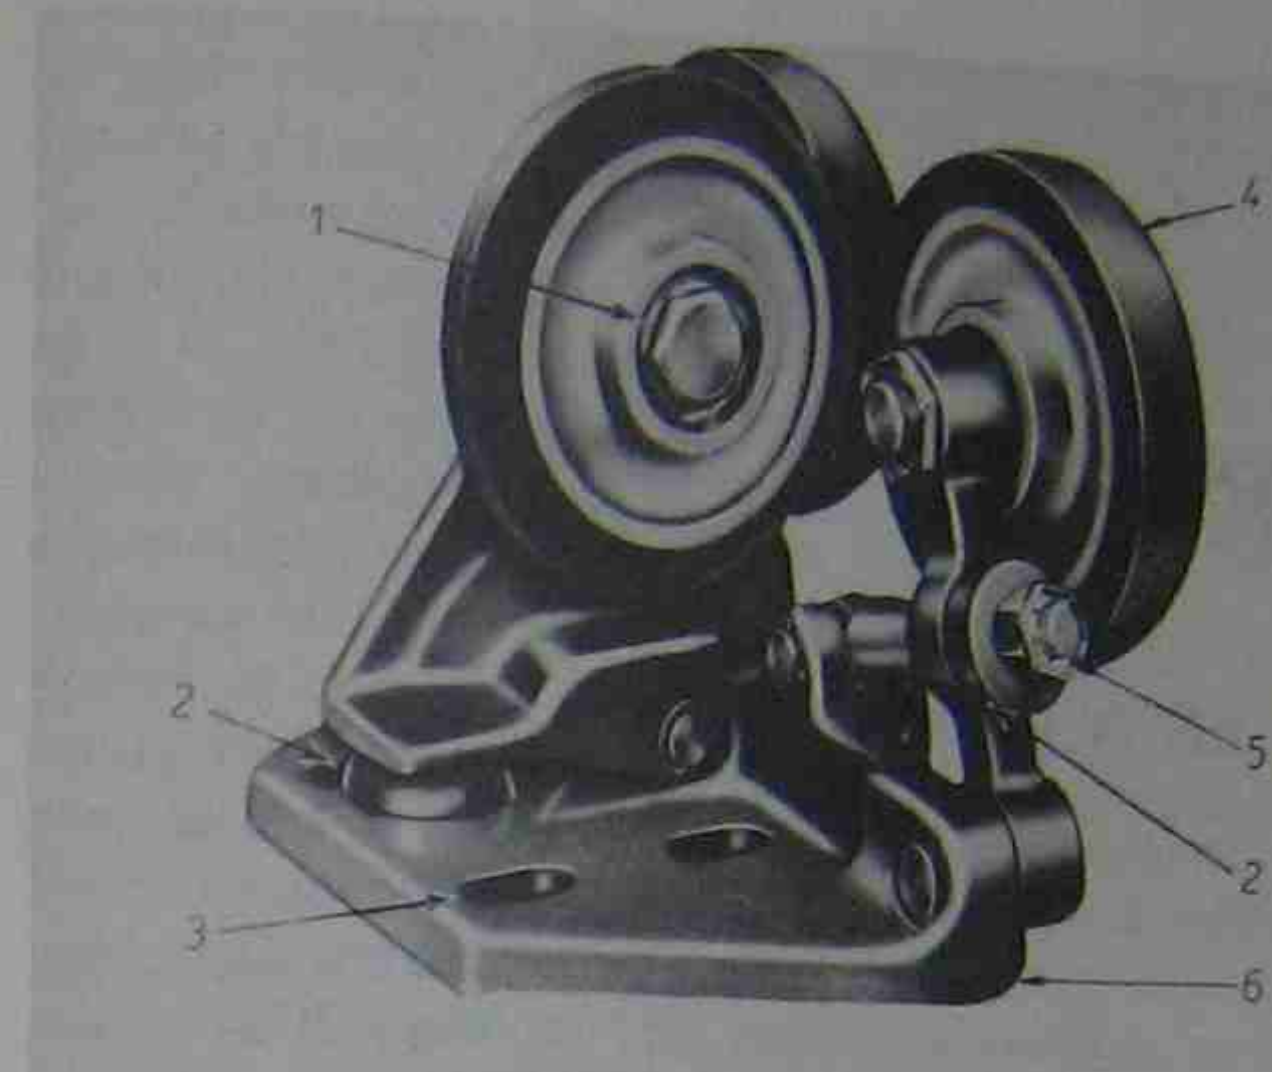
Roller guide shoes with rubber cushions (Moline Accessories Co.).
